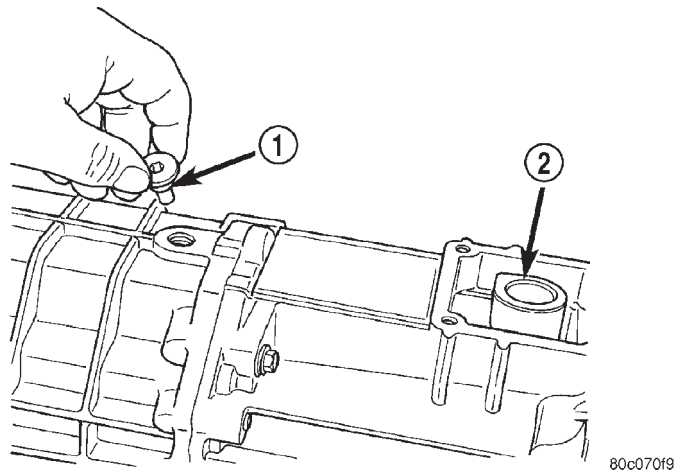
Installing Shift Shaft Bushing Lock Bolt
